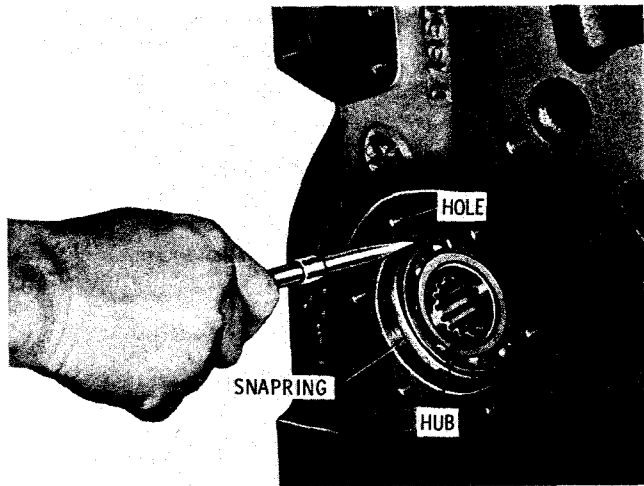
Installing pump drive gear hub bearing snapping S1703
